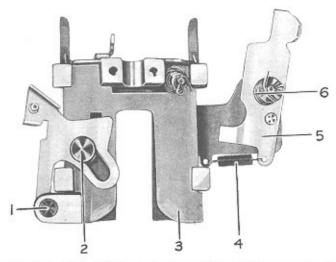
No. 11946-A Selector Slide and Cancel Plate Assembly (Back View)
